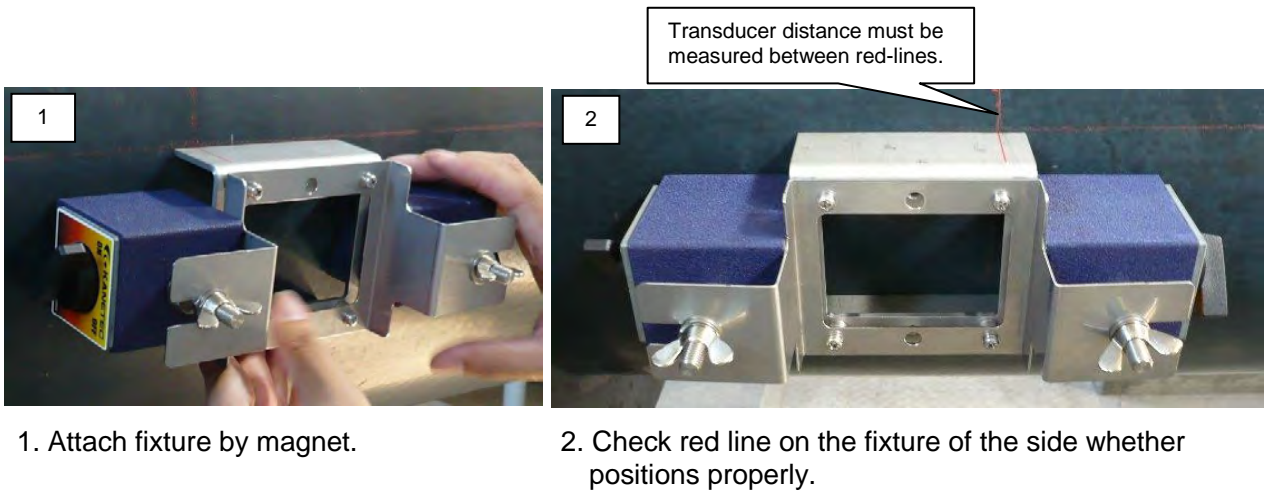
Set the mounting fixture with the magnets
